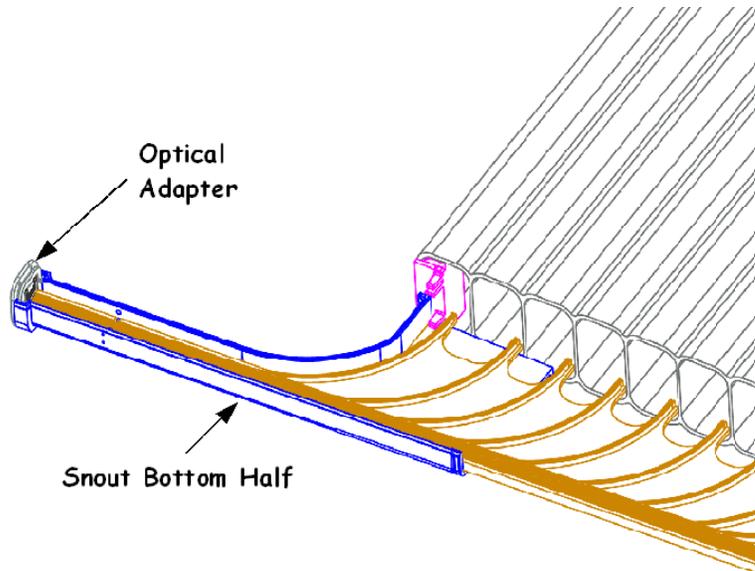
Placement of the snout lower half on the module. The lower fiber raceway locates this part relative to the center of the extrusion assembly. The optical adapter has been preassembled on the snout lower half.
